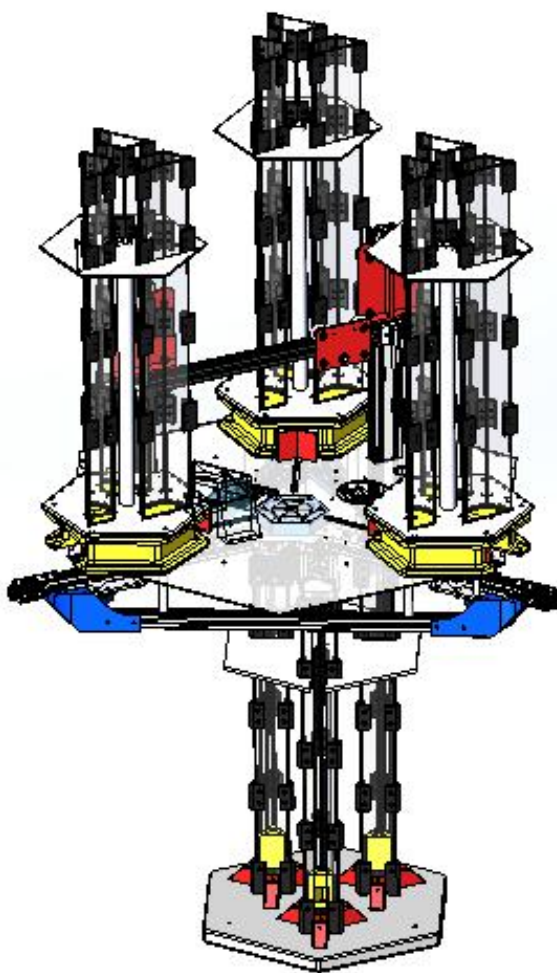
Automated Assembly Machine with Magazine Removal System
